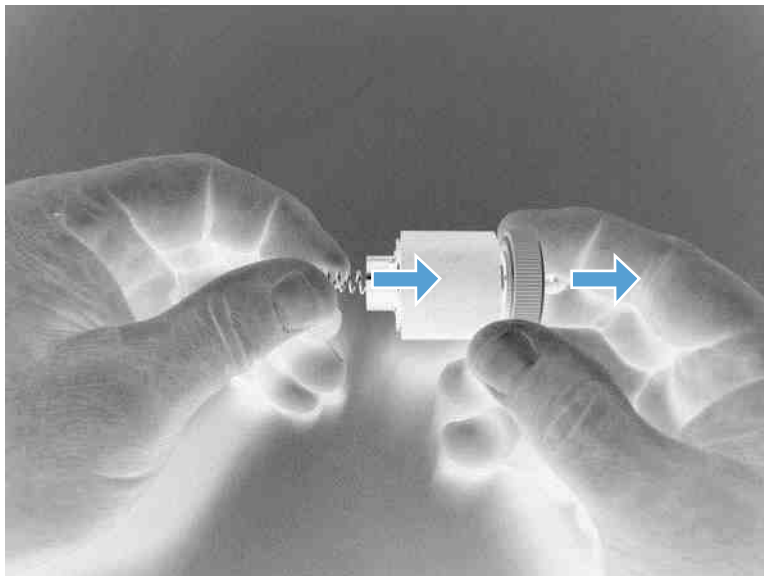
Reassemble the Tray 2, 3, or 4 pickup roller assembly (4 of 9)
